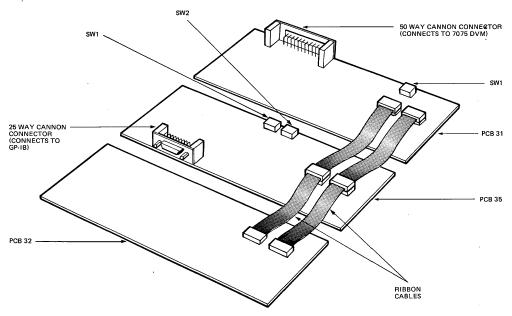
Simplified exploded view showing pcb assembly removed from case
